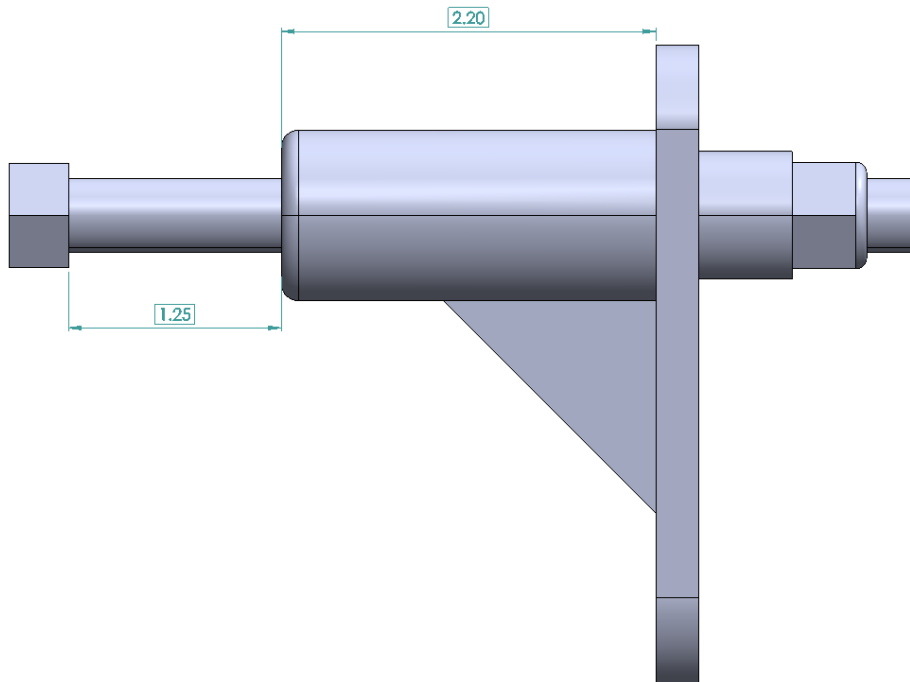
SIDE VIEW OF SLEEVE CONNECTION WITH RELEVANT DIMENSIONS MARKED.
